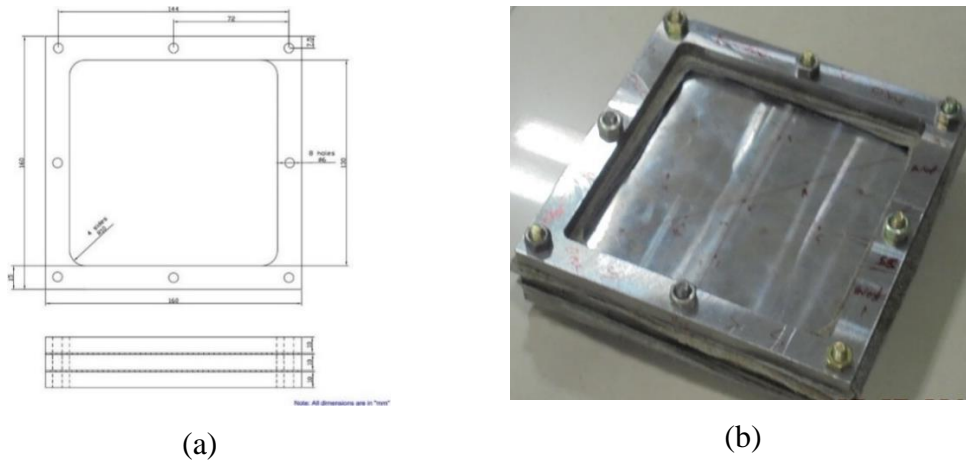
Fixture dimensions (a) two dimensional drawing (b) substrate fitted in fixture.
